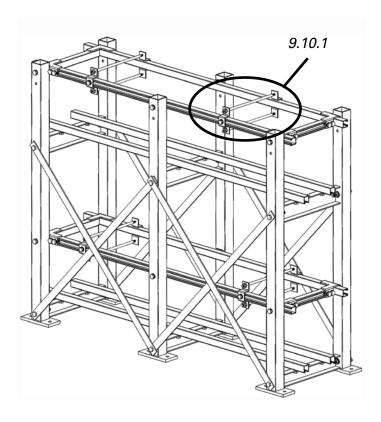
End to End Rail Connection Assembly. Only for non-seismic racks (Refer to Support Rail Assembly)
